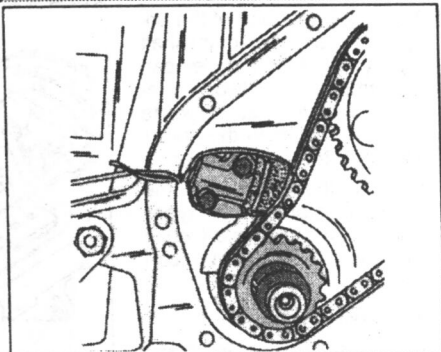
A Renold chain tensioner must be tied together with a piece of wire before it can be removed from the cylinder block.
